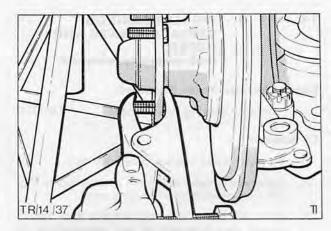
Removing wheel stud using Special Service Tool 13 006
